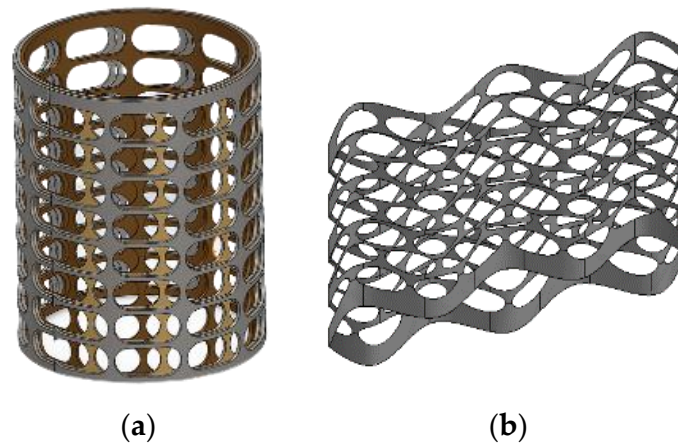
Products with a permeable structure: cylindrical shape(s), obtained by folding a tape or sheet and welding to the height of the cylinder(s) (a); with complex spatial configuration, obtained by profiling tapes and connecting them by spot welding (b).
